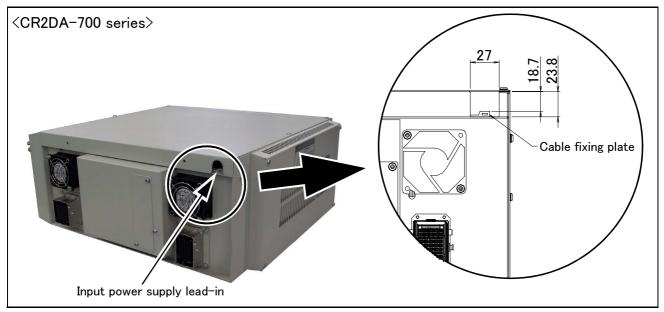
Cable lead-in and dimension of the controller (CR2DA-700 series)
